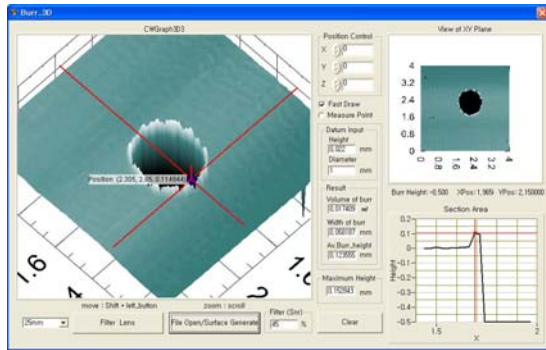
Measurement of Burr in Drilling $\phi 1$ Hole
